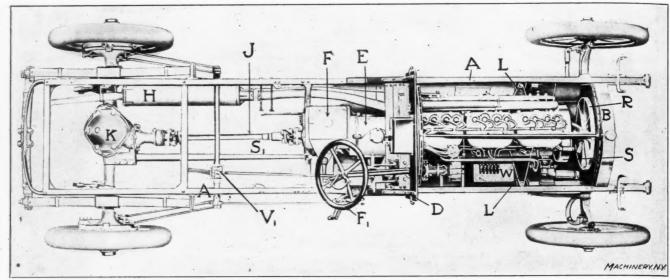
Top View of Chassis, showing Arrangement of the Mechanism
